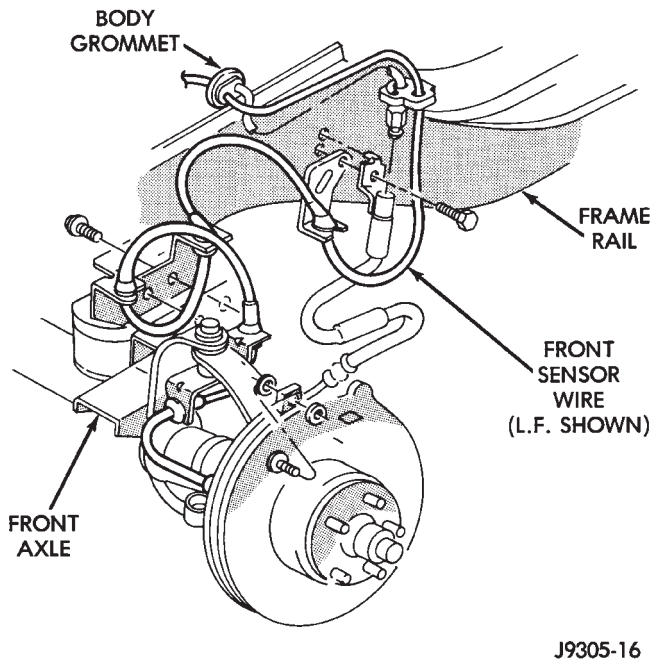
Front Sensor Wire Routing (Left Front Shown)
